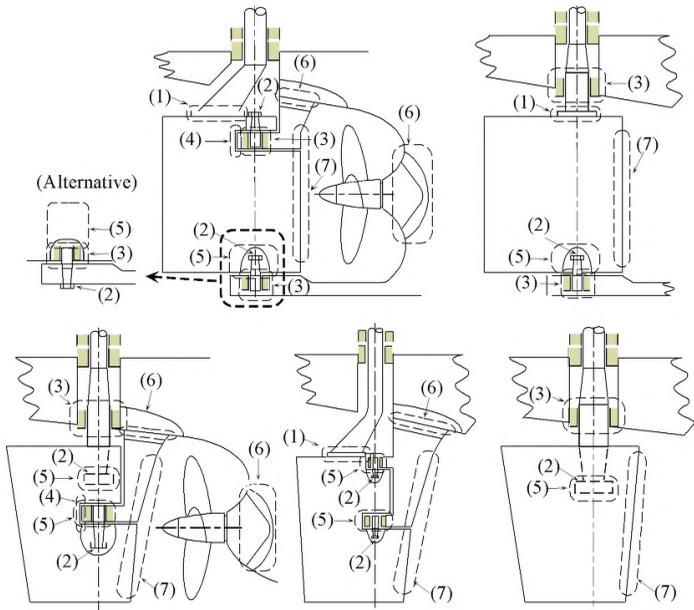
Nomenclature for stern frame, rudder arrangement and propeller shaft support
